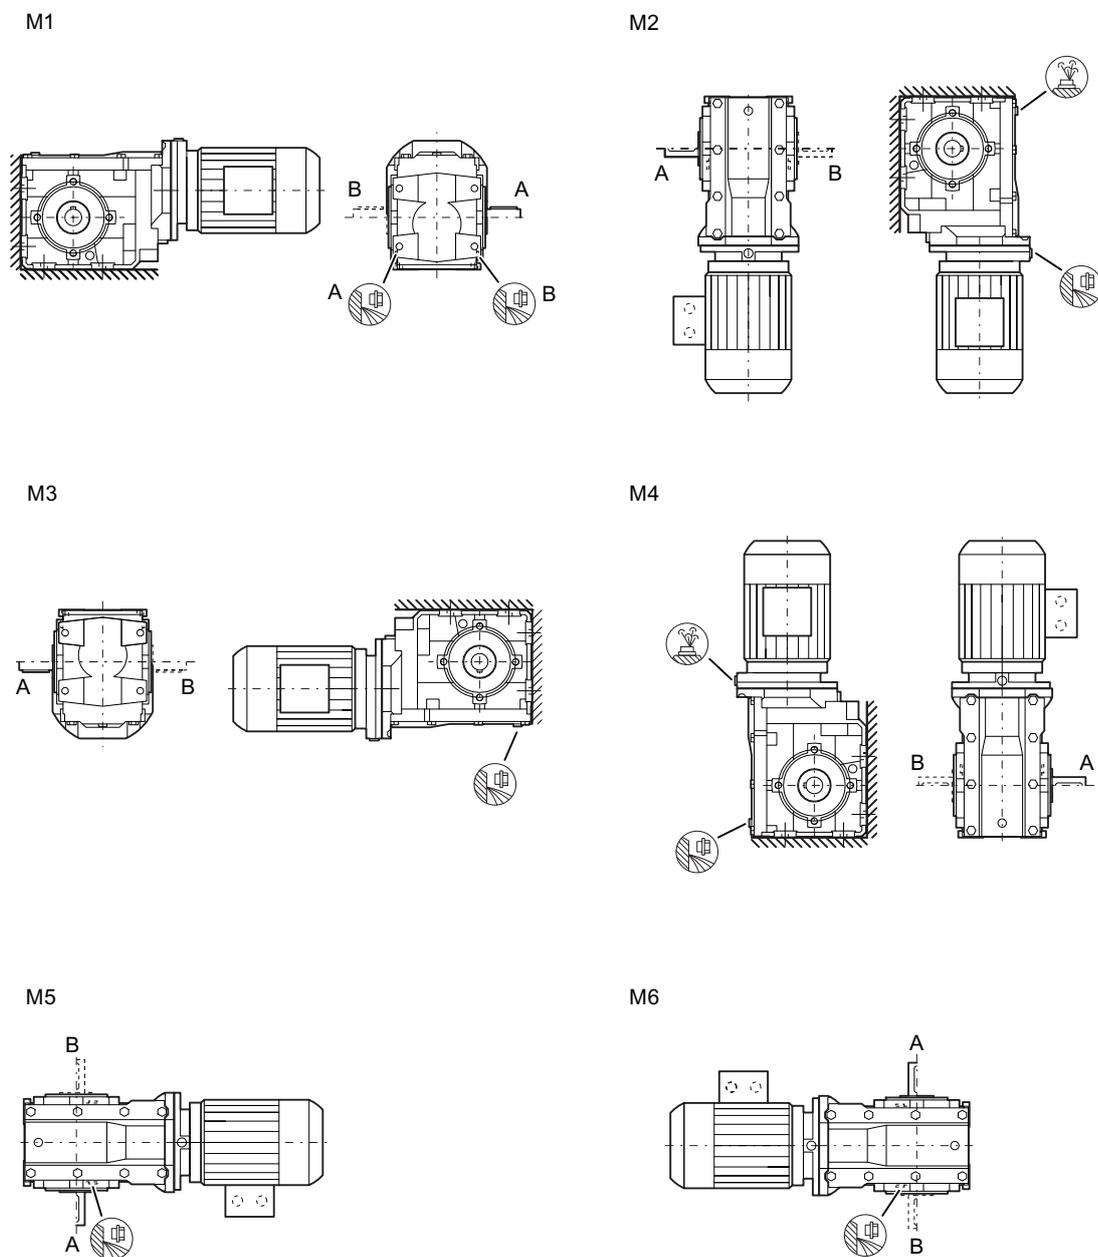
Mounting position for bevel gearbox B foot-mounted design, size 29
